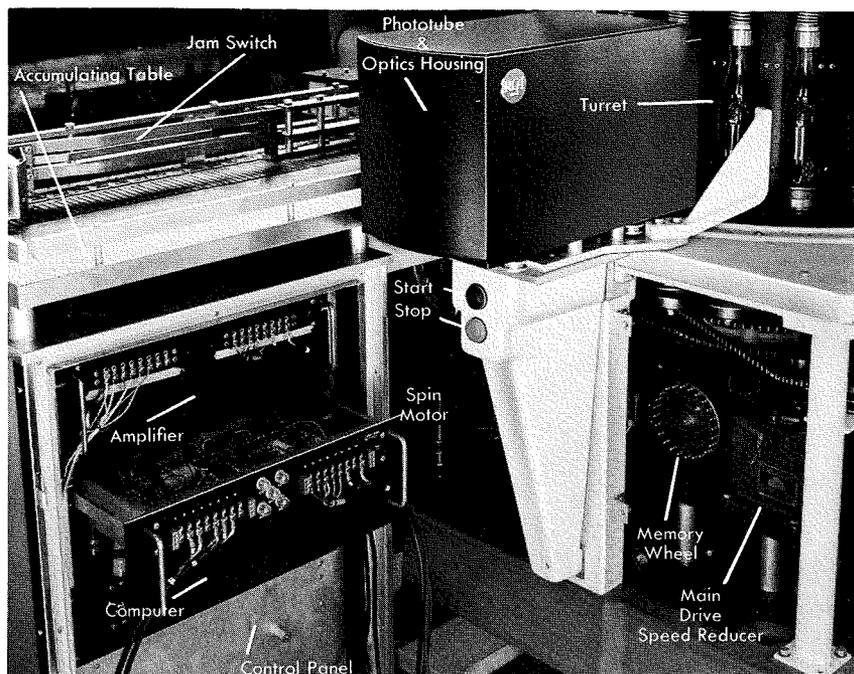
Side view of the type "S" B.I.M. showing the electronics cabinet on left (pulled out for service); black box houses the optical and phototube system; at right is the main drive gear reduction unit.
